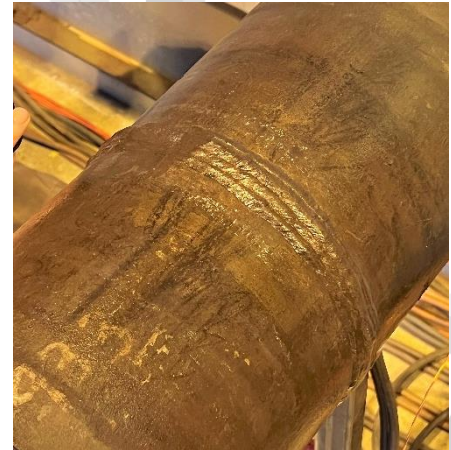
Photograph of the pipe weld inspected at 200 °C.
